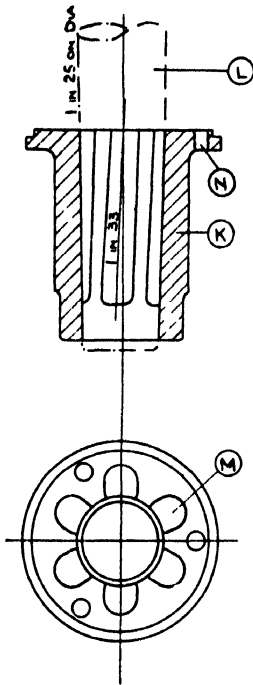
SIX-ROLLER TUBE EXPANDER CAGE
